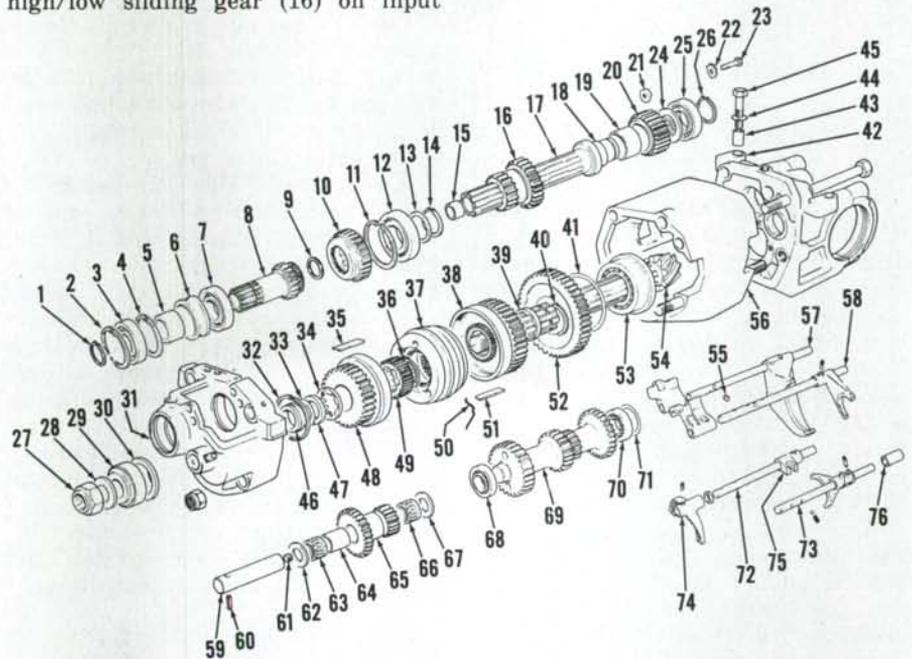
Exploded view of 12-speed synchromesh transmission used on early 1394 (prior to P.I.N. 11139846), early 1494 (prior to P.I.N. 11194089) and all 1490 models.
